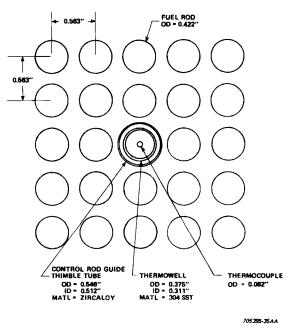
Partial Fuel Assembly Cross-Section Showing Thermocouple, Thermowell, Control Rod Guide Thimble Tube and Fuel Rod Configuration for Fuel Assembly Internal Temperature Measurement Test A complete analysis of the difference between the measured temperatures and actual fuel rod clad temperatures should consider natural circulation within the canister, the fuel assembly axial power distribution, all three heat transfer modes, and gas mixing between the fuel assembly and downcomer (the annular space between the fuel assembly and canister re-This study would be comgions). plex and would require a computer code designed specifically for spent fuel storage analysis. Α one-dimensional model has been developed to approximately analyze differentials. temperature The model and the analysis results are presented and discussed in this section.
